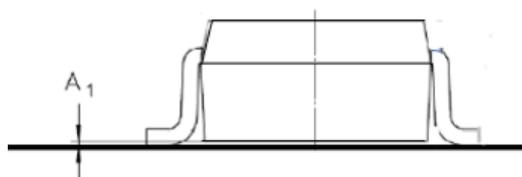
Gullwing package with stand-off height from PCB of approx. 50µm
